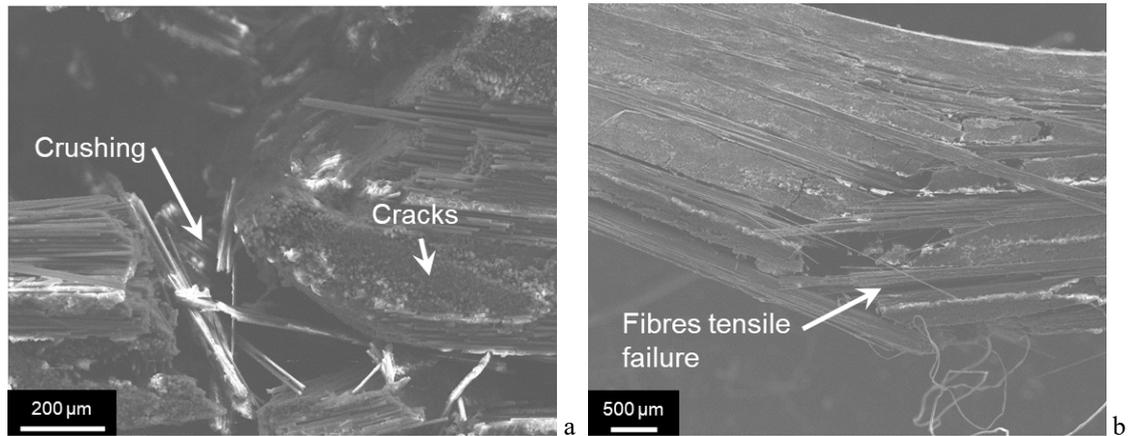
Fracture morphology for the long beam specimen bonded with prepreg resin: a) upper zone; b) lower zone.
